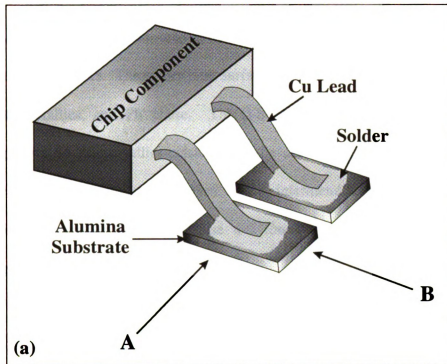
A schematic drawing of solder joint used in this study. The cross section in A and B direction is used to examine as-soldered and thermally cycled joints, respectively.
